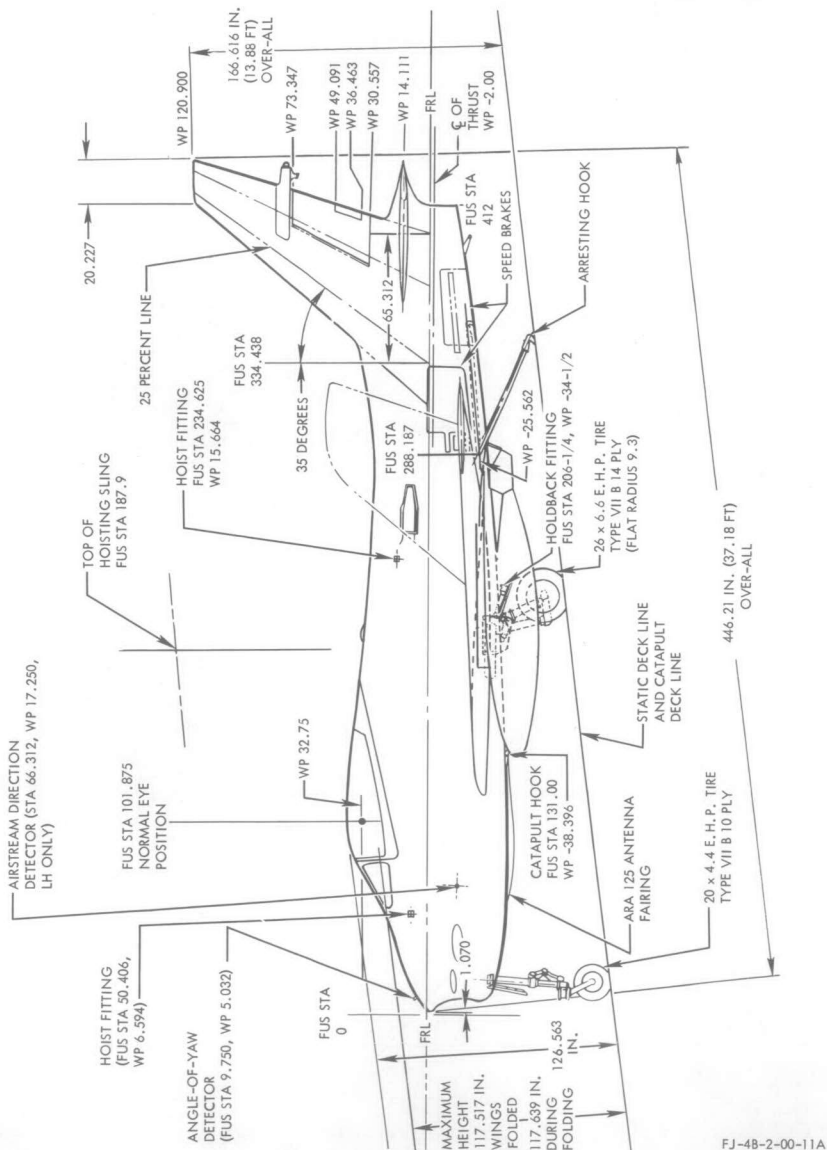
Airplane Dimensions (Sheet 1)
